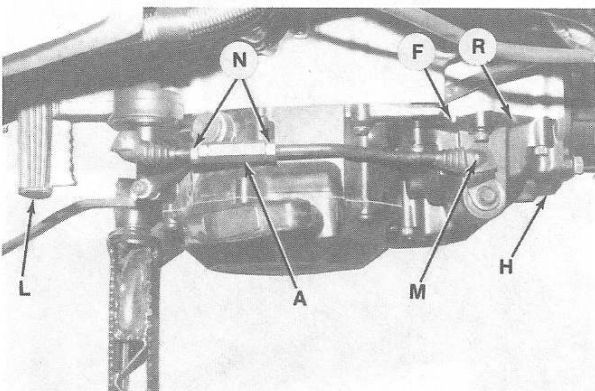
Rotate shift rod adjuster (A) so marks (F and R) on crankcase align with mark on shift arm cover. See text.
